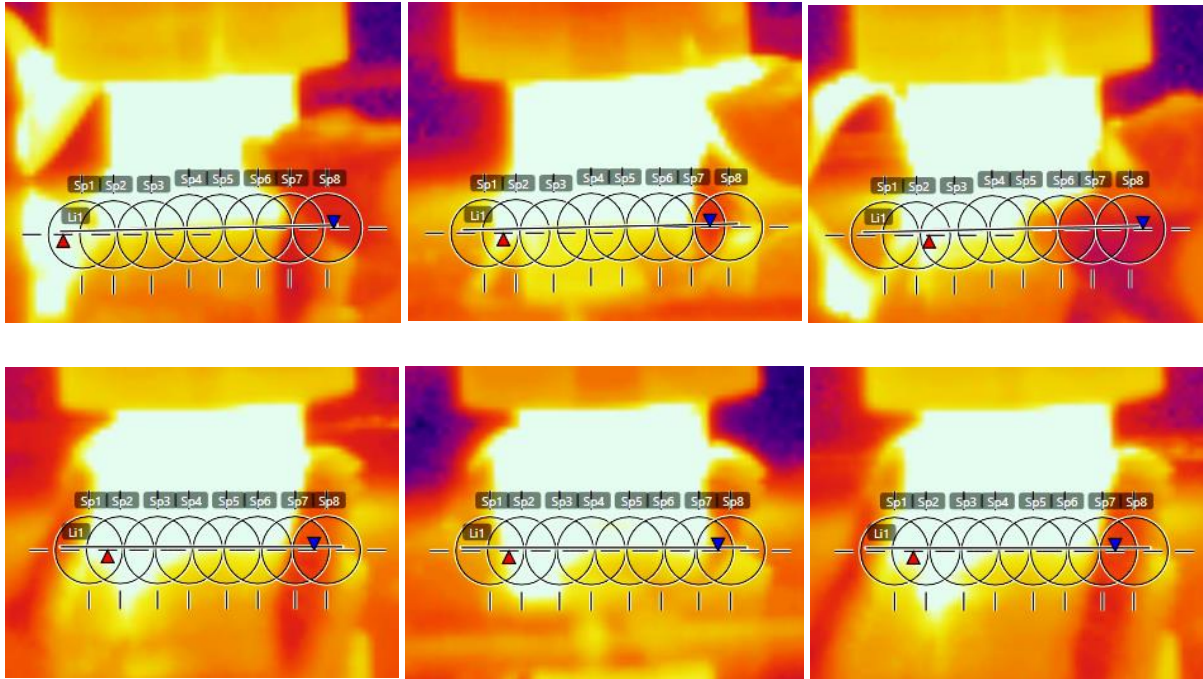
Unequal Cooling across the Joint during the Welding Process
